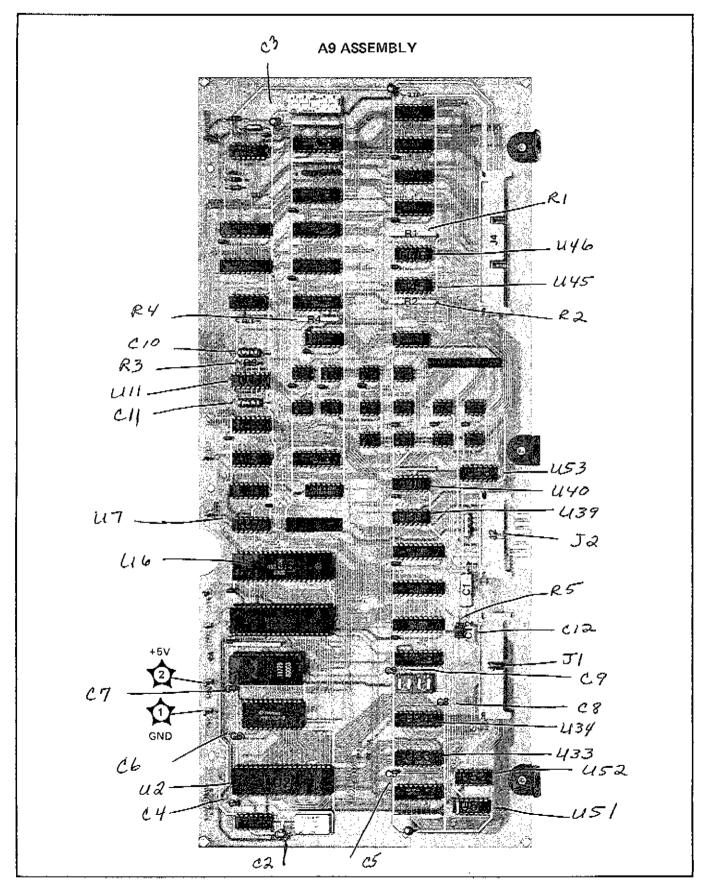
P/O Microprocessor Board Assembly Component Locations (P/O Change A)
